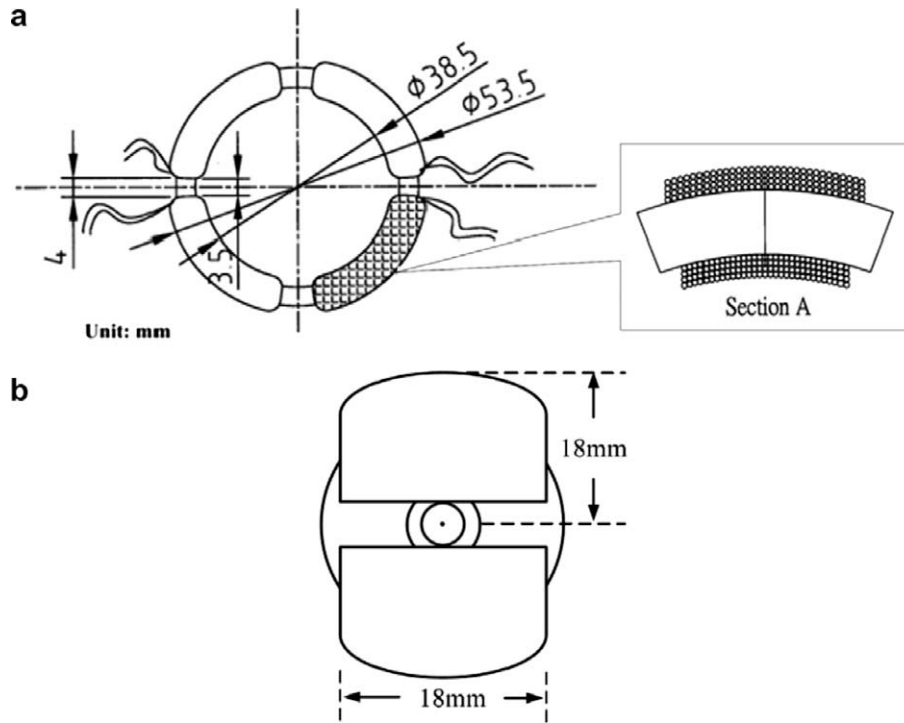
(a) Schematic diagram of the toroidally wound stator assembly. (b) Physical size of the permanent magnet rotor assembly.
